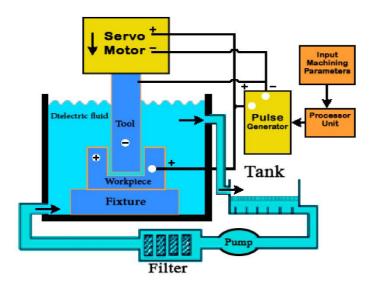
A Die-Sinking Electrical Discharge Machining
